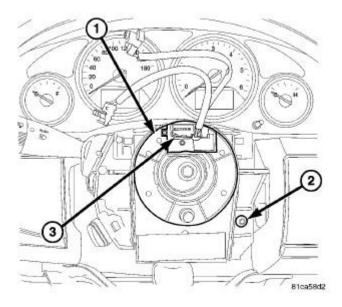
Identifying SCCM Lower Mounting Screw Courtesy of CHRYSLER LLC
